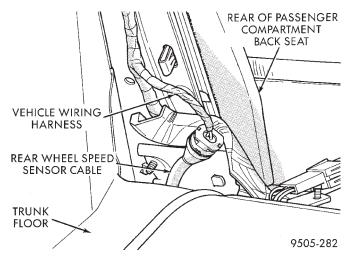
Rear Speed Sensor Cable Connection To Vehicle Wiring Harness
